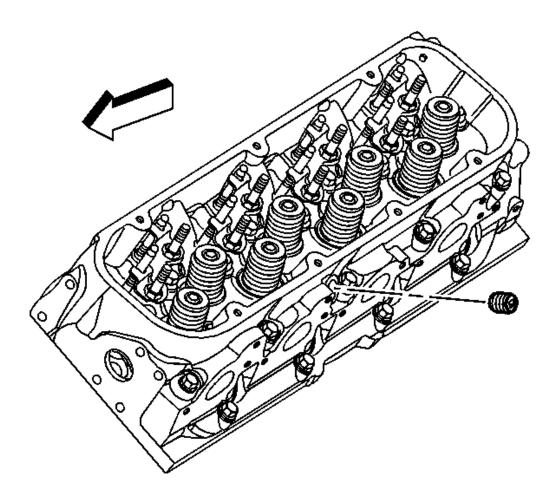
View Of Cylinder Head Coolant Hole Plug Courtesy of GENERAL MOTORS CORP.
